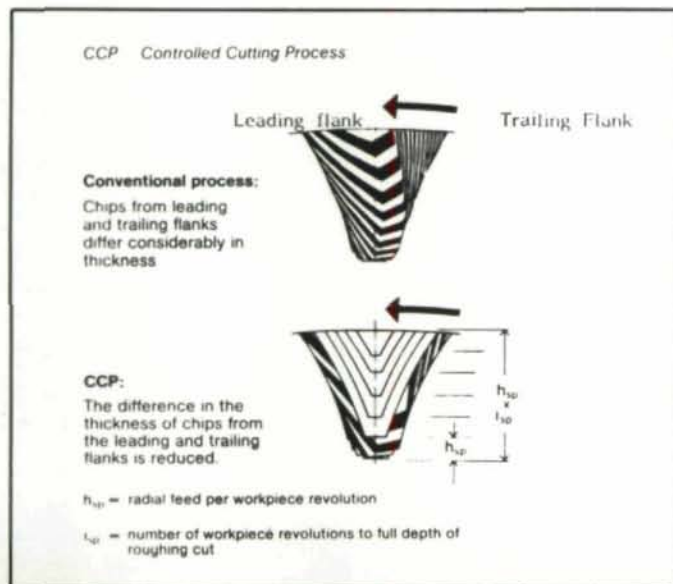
New Infeed Technique — CCP Controlled Cutting Process.
